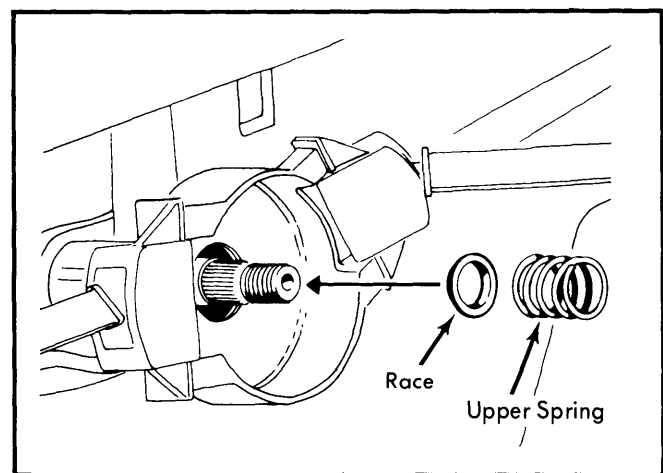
Install Upper Bearing Race and Spring to Steering Column
